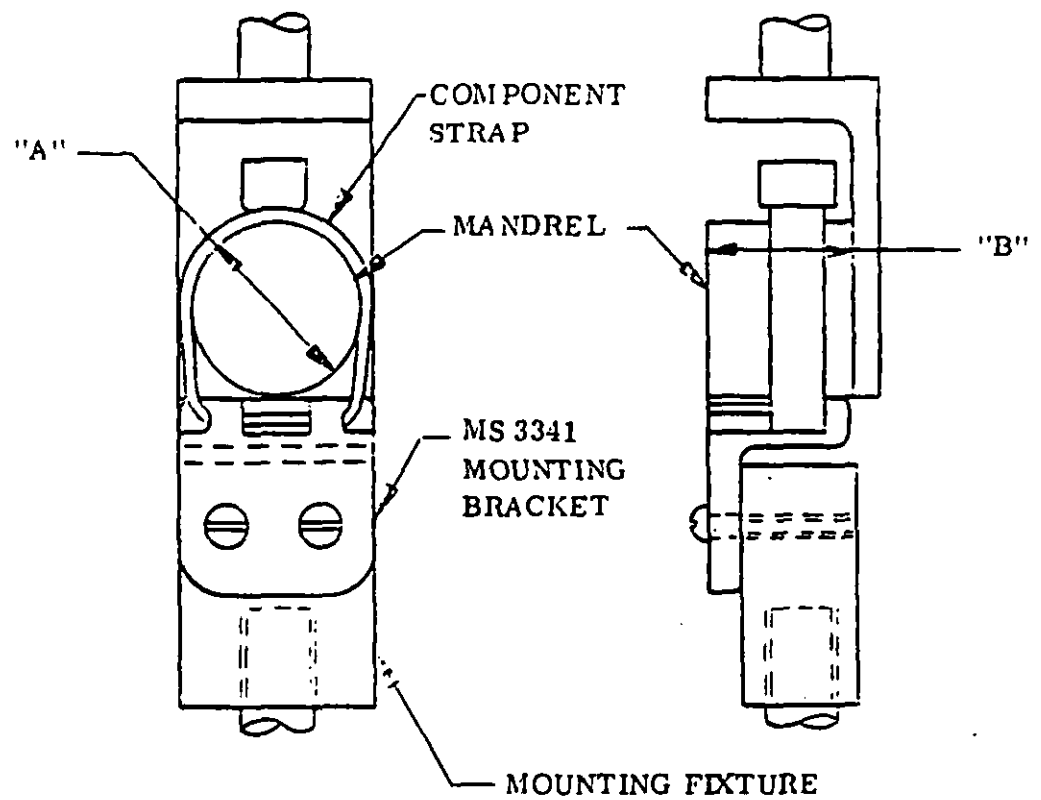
Tensile test fixture for Type IV plastic mounting plate.
